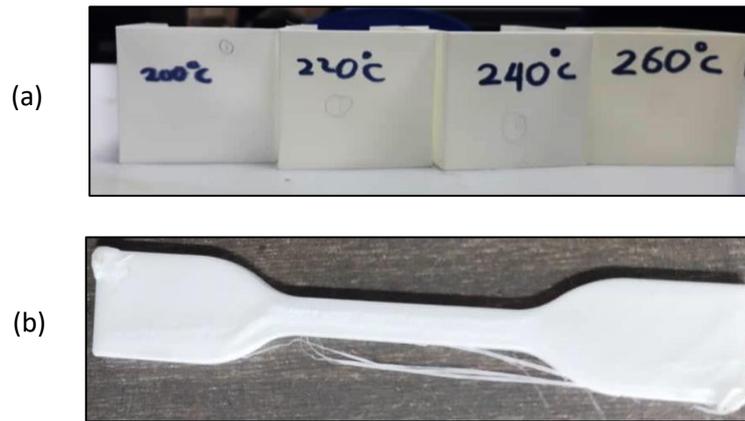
The appearance of (a) a printed sample of cube 0% infill and (b) a dumbbell ISO527
